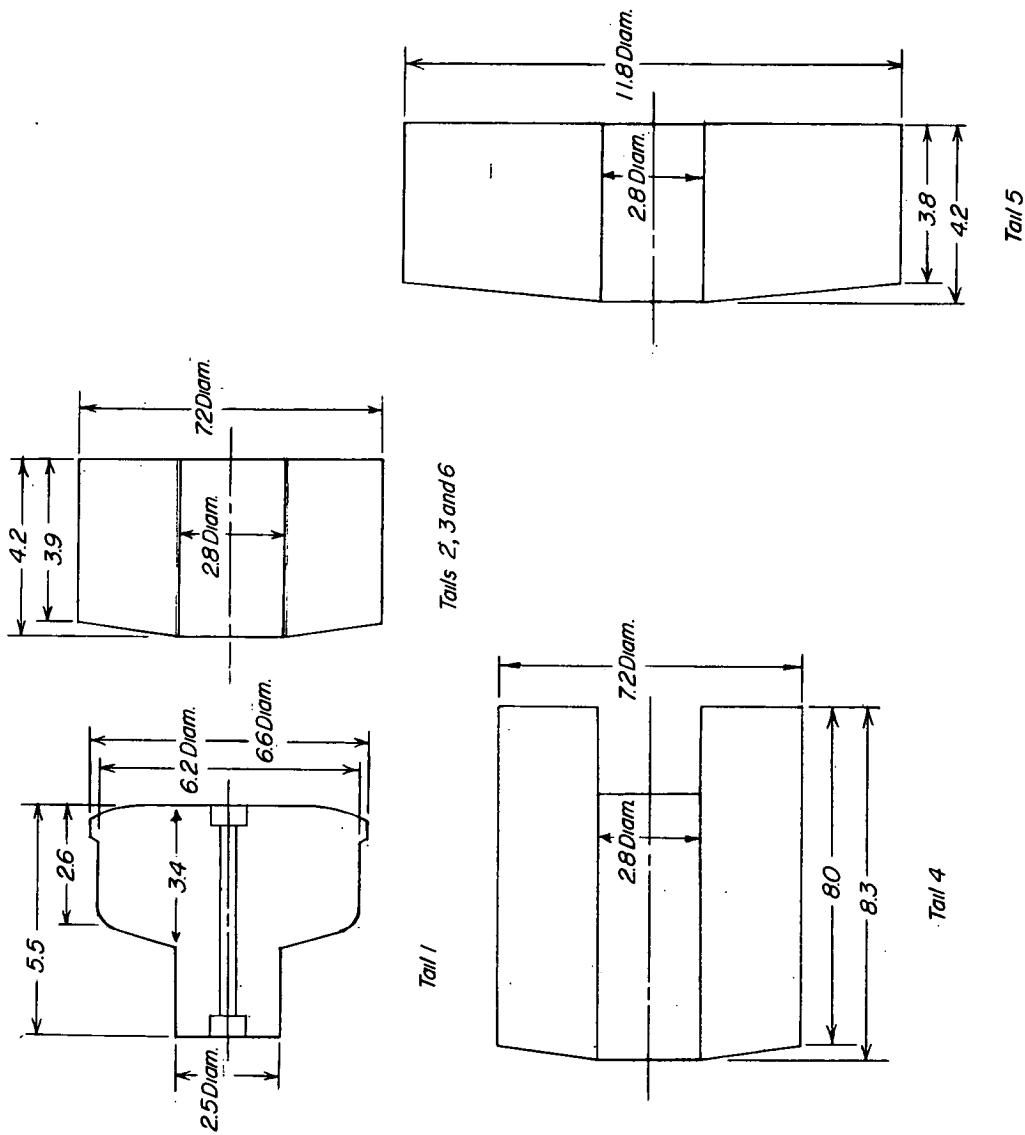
Dimensions of tails tested. Dimensions are in inches.
